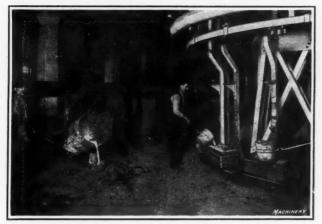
To facilitate pouring metal into molds in the Ford Motor Co.'s foundry, molds are brought in on a conveyor and transferred to a carousel on which each mold is supported by a pendulum. This swinging support eliminates vibration and prevents molds breaking. Molds are carried away by a second conveyor
